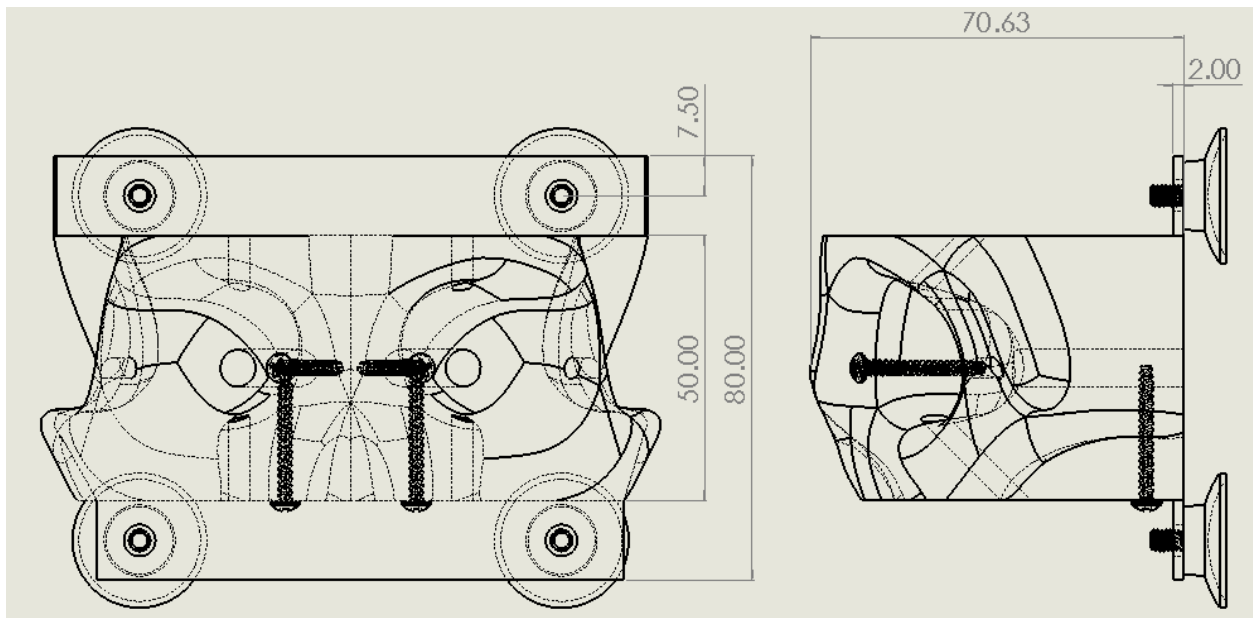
Dimensioned drawings of the lateral canthotomy base. This base is approximately 110x70x60mm, with the center of the orbit located 25.21mm from the top plane.
